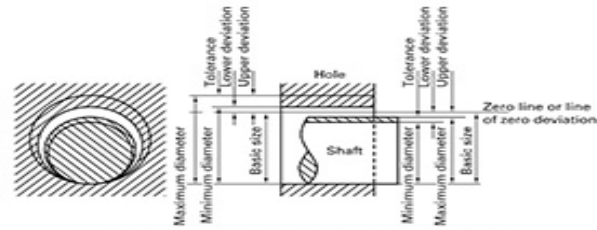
When mating parts are designed, each shaft must be smaller than each hole for a clearance fit.
